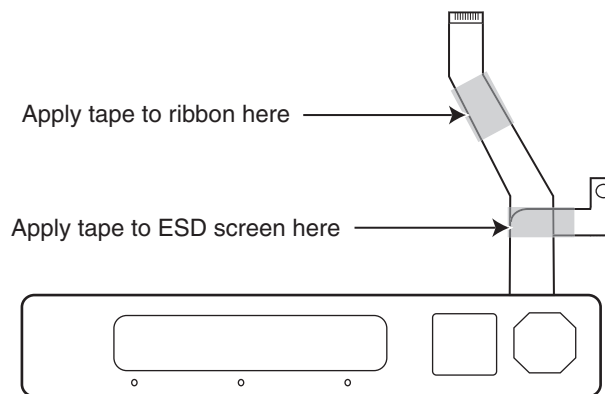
Pump Module Keypad Insulation Tape Installation
